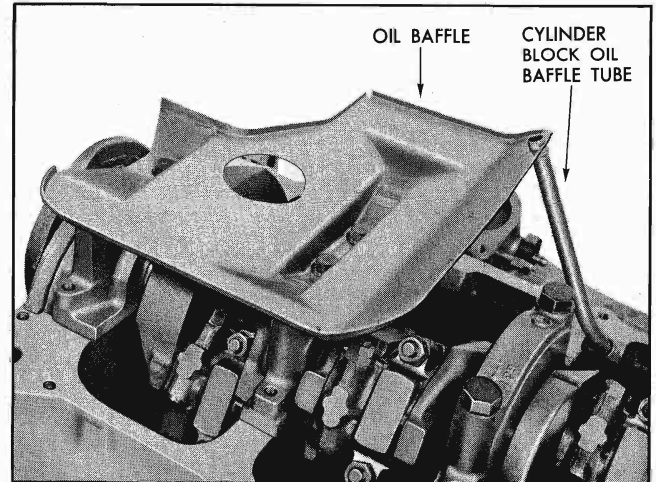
Engine Oil Baffle and Tube Assembly
